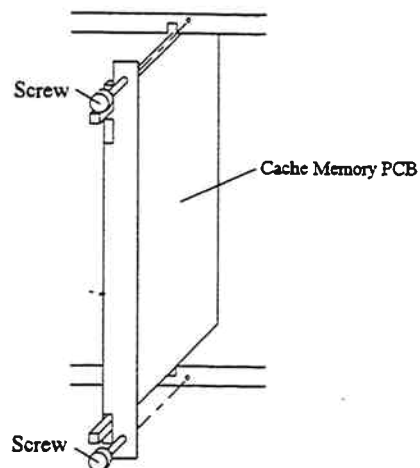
Removal of the Cache Memory PCB
